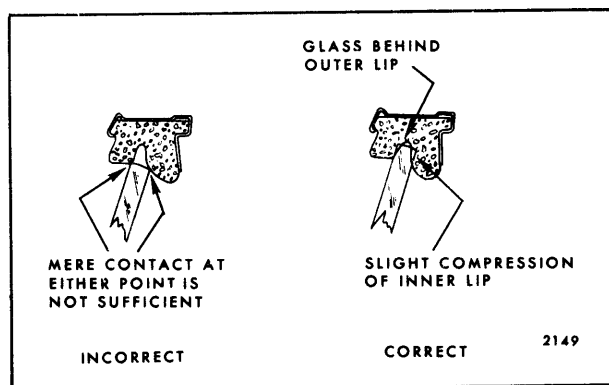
Window to Side Roof Rail Weatherstrip Alignment
